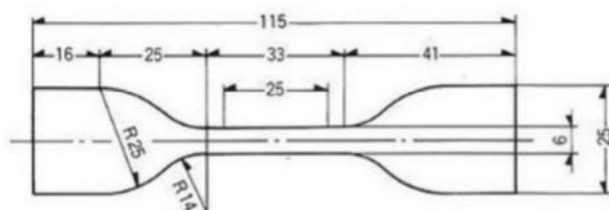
Shape and dimensions of 2 mm thick mould.
